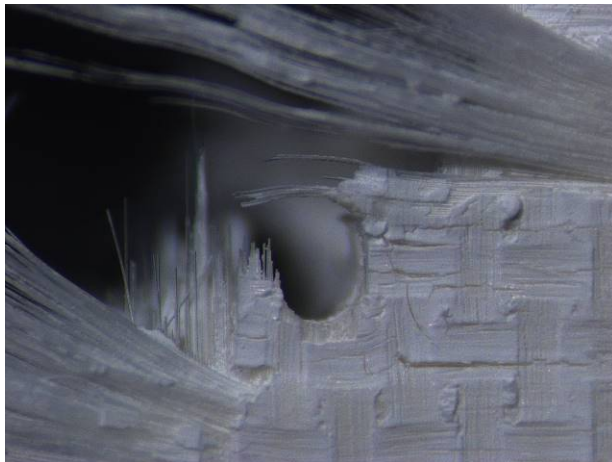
Fracture surface of specimen #7, tested in tension to failure following 100 h creep at 46 MPa at 1200°C in air
